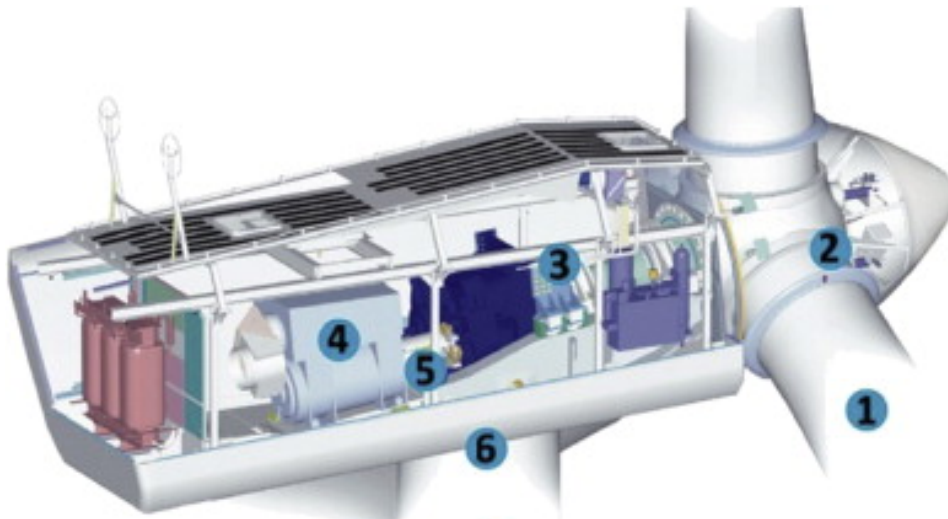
Main parts of rotor – nacelle assembly (1) blades, (2) rotor, (3) gearbox, (4) generator, (5) bearings, and (6) yaw system (Márquez et al., 2012).
